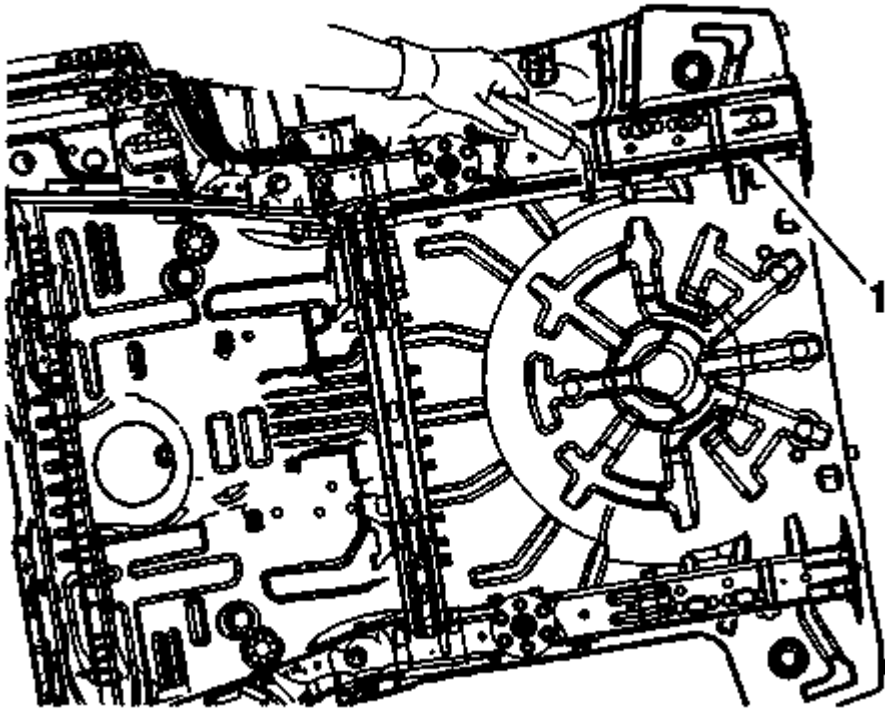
Plug Welding Rear Rail -- Rear Section
